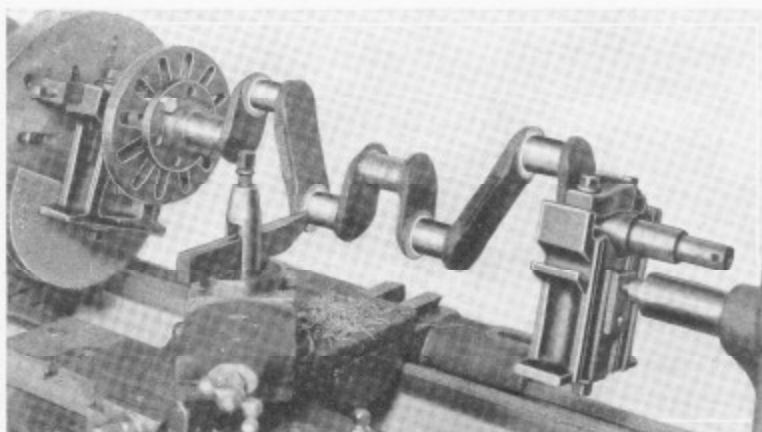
Truing Crankshaft Throw Bearings using Norton Throw Centers
